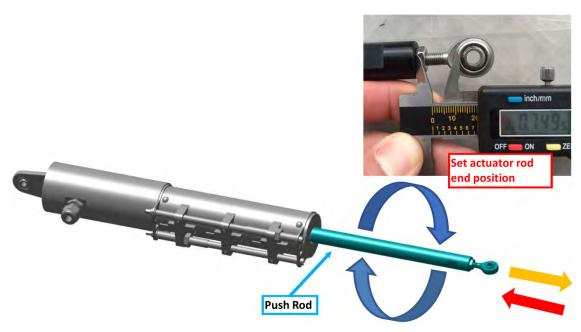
SET ACTUATOR ROD END POSITION
